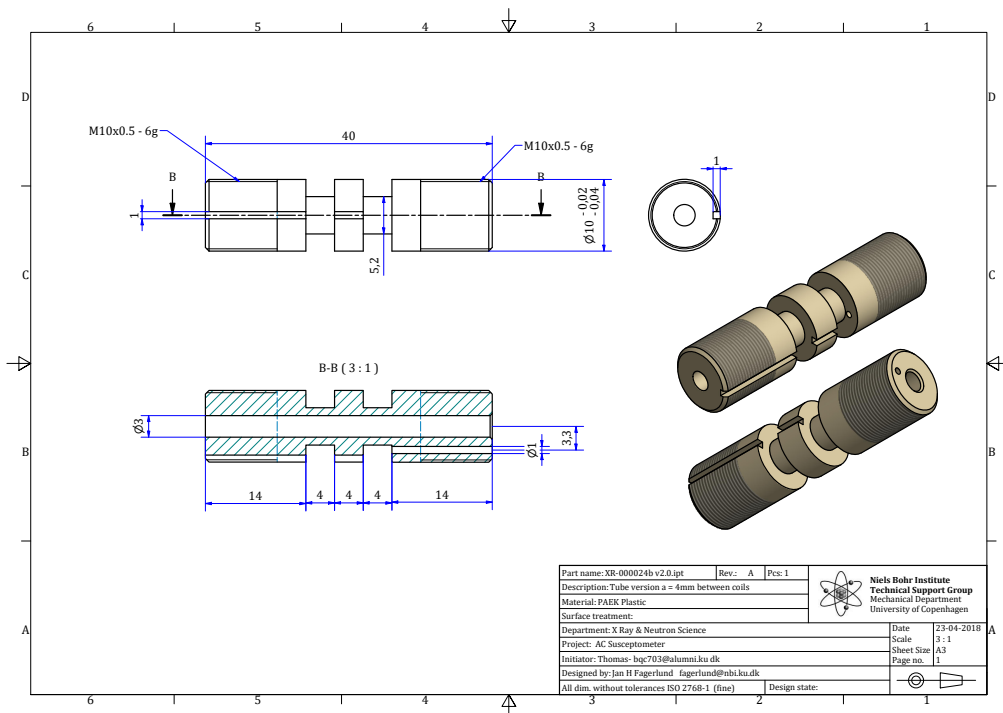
The drawing of the coilform for the detector coils. Drawn by NBI Mechanical and Electronic Workshop.
